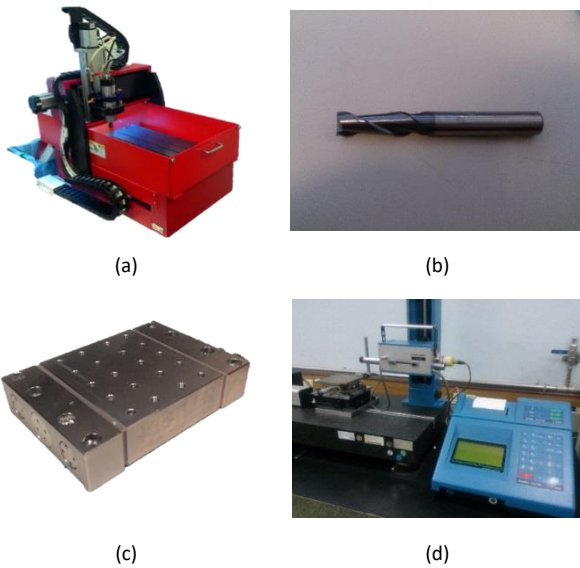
Experimental equipment: (a) CNC milling machine; (b) 6 mm end-mill tool; (c) 6-axis dynamometer; (d) Surface metrology equipment.
